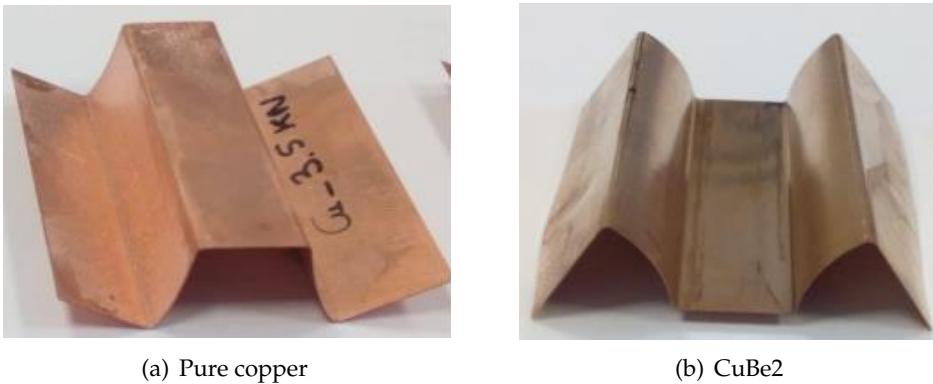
Images of deformed part shape after drawing and springback of 2 copper alloys: aligned case. Scale: the length of the part is 36 mm
